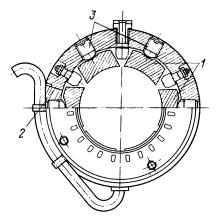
Segmental bearing. General arrangement i — segments; i — split joint of bearing shells; i — adjustment screw
